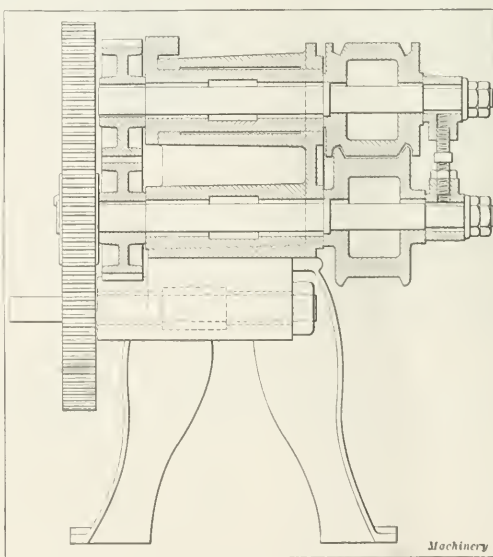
Sectional View through Channeling Machine to show Roll Construction
